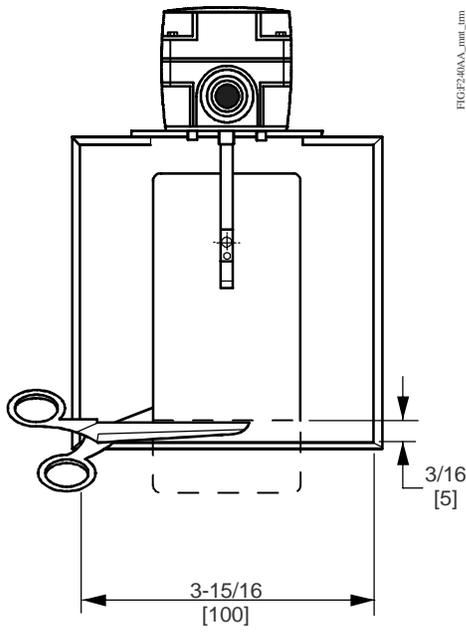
Trimming the Paddle, Dimensions, in. [mm]
